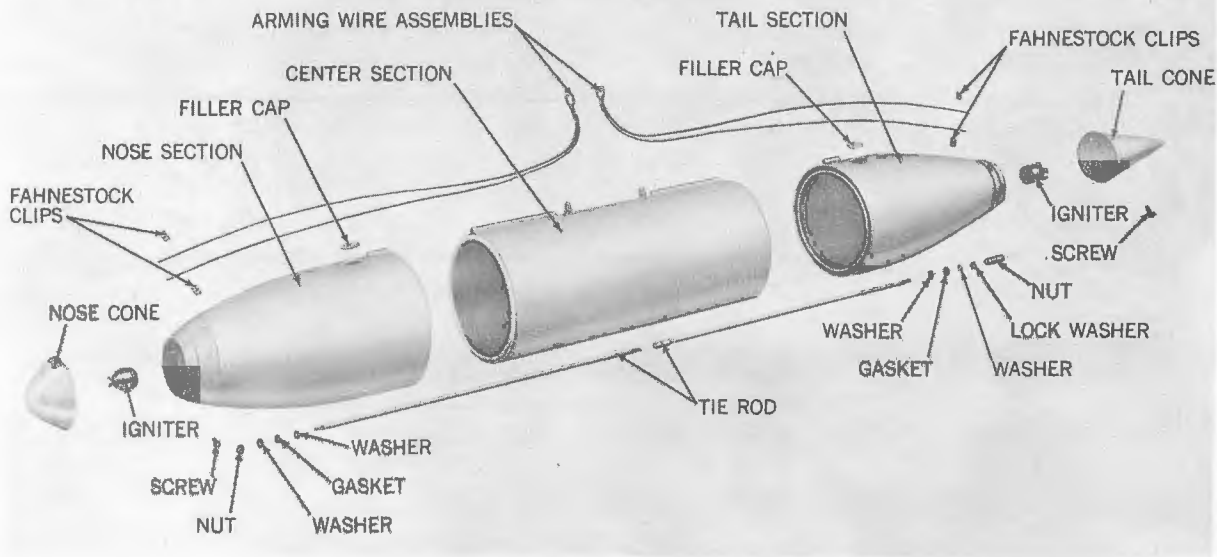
750-lb Fire Bomb Mk 77 Mod 0, Exploded View.
